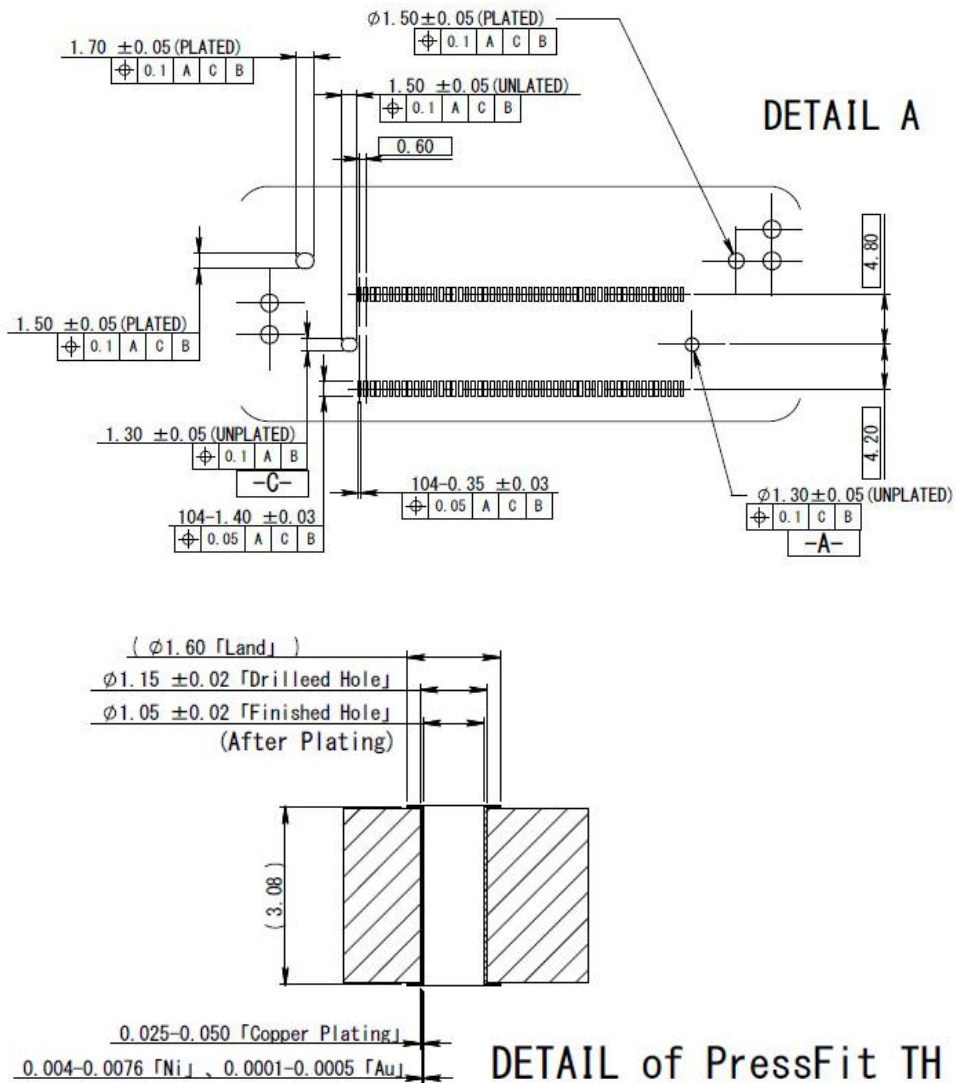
Mechanical Dimensions of Electrical Connectors on CFP2 Host PCB(unit mm)
